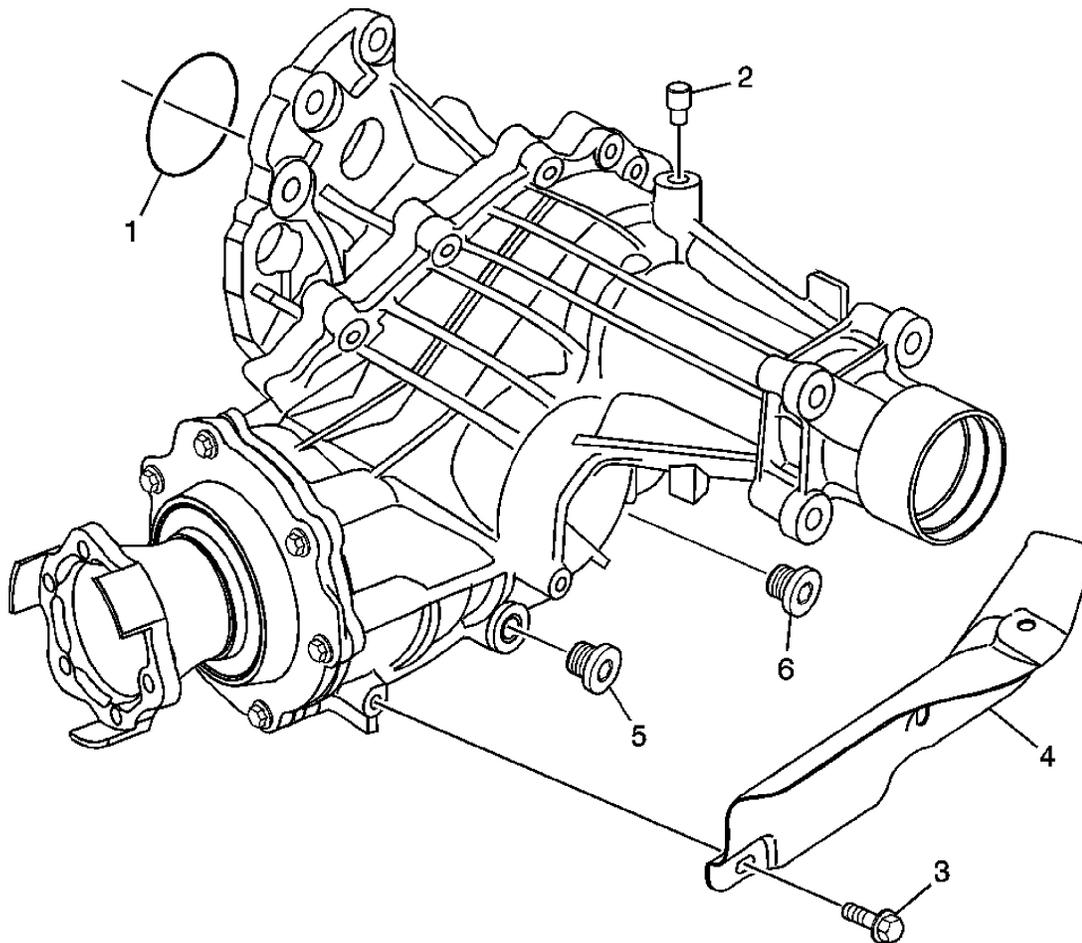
Identifying Housing O-Ring, Vent Assembly, Drain & Fill Plug
